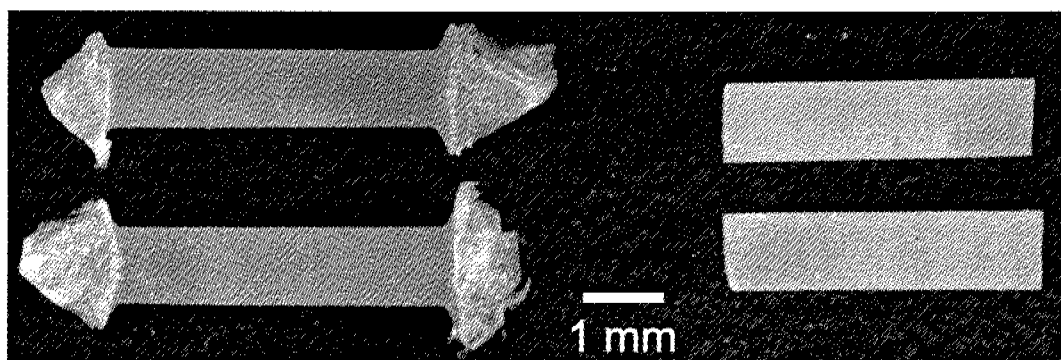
DWEC after lathing; left: Examples with clamping edges and right: After cutting off the clamping edges.
